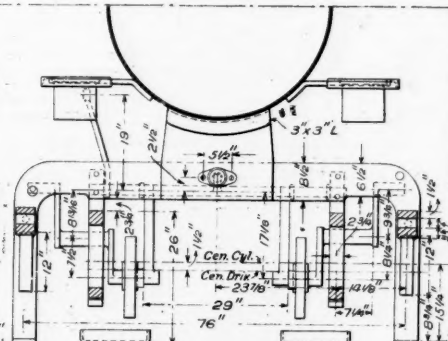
Cross-Section Back Between Front and Rear Drivers.
